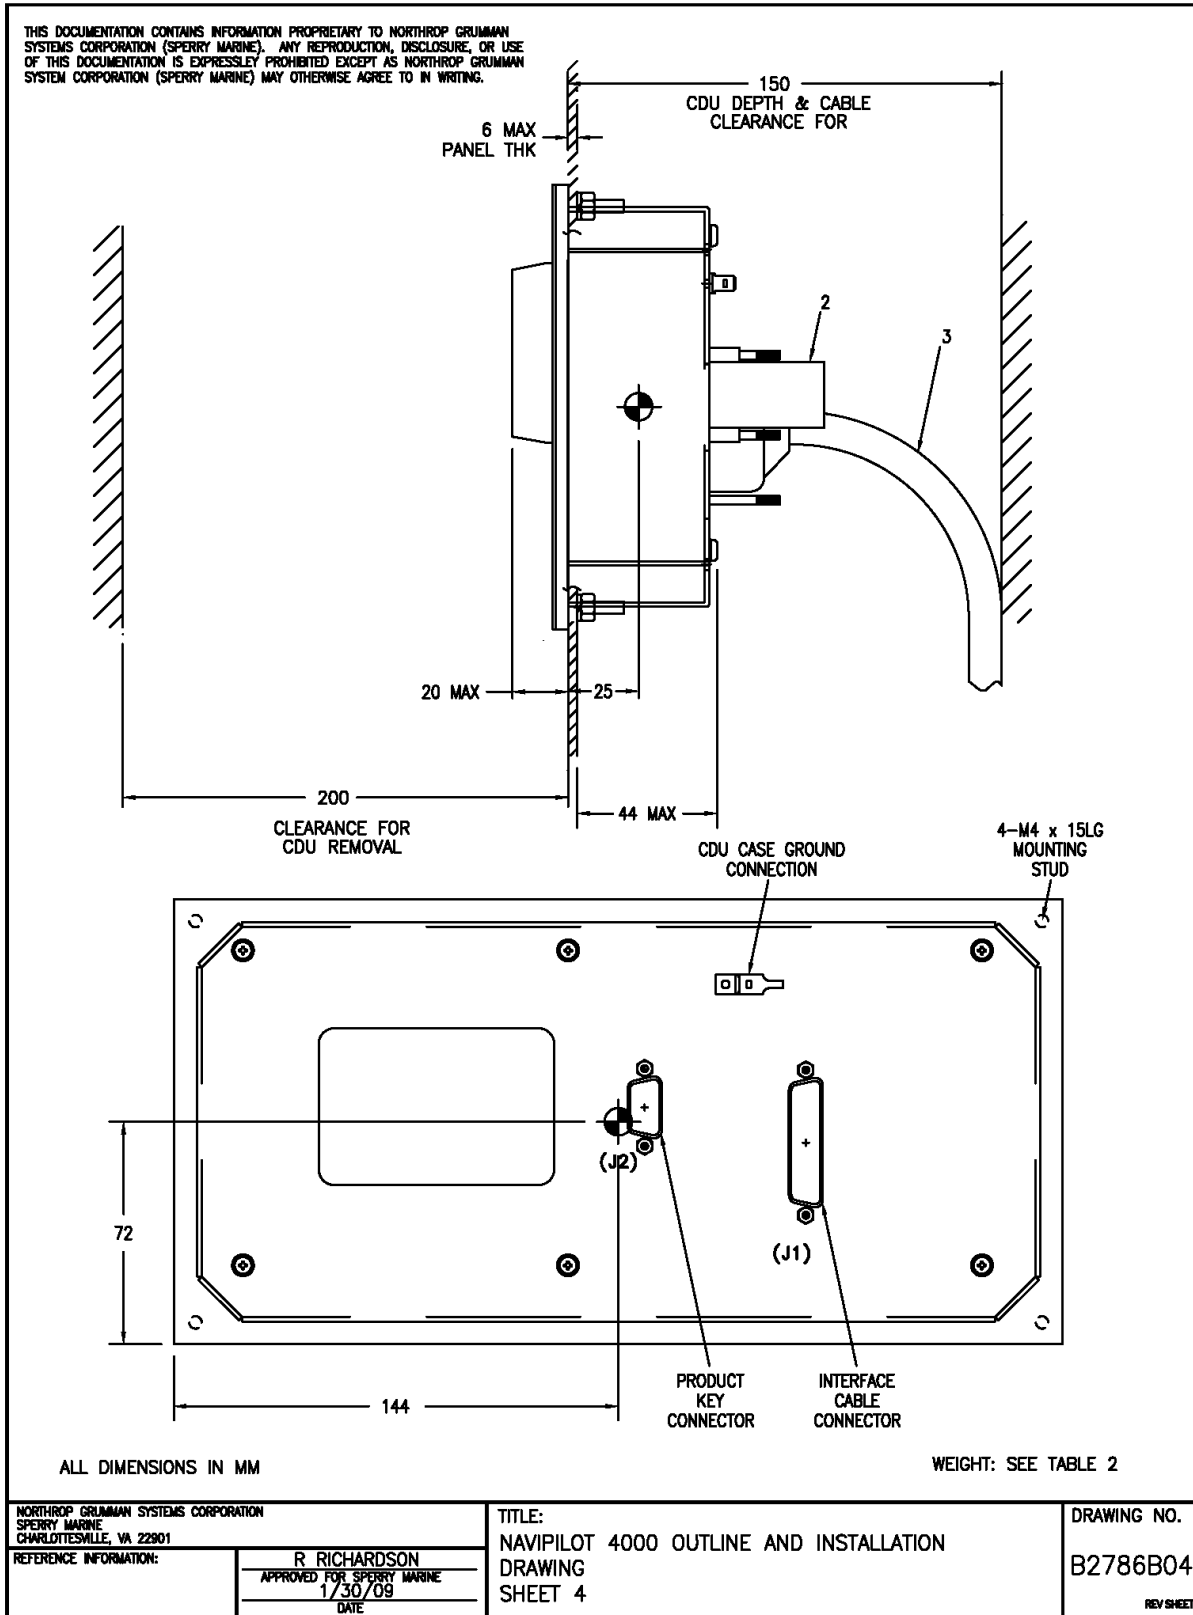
Outline and Installation Drawing (sheet 3 of 6)
